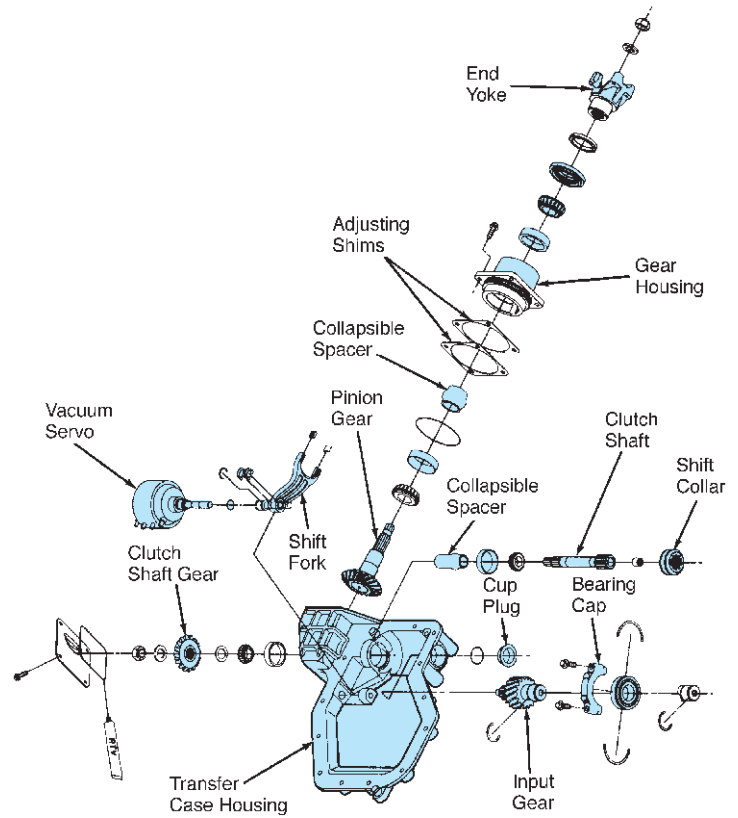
An exploded view of a power transfer unit (PTU) that is attached to the transaxle. (Courtesy of Ford Motor Company)
